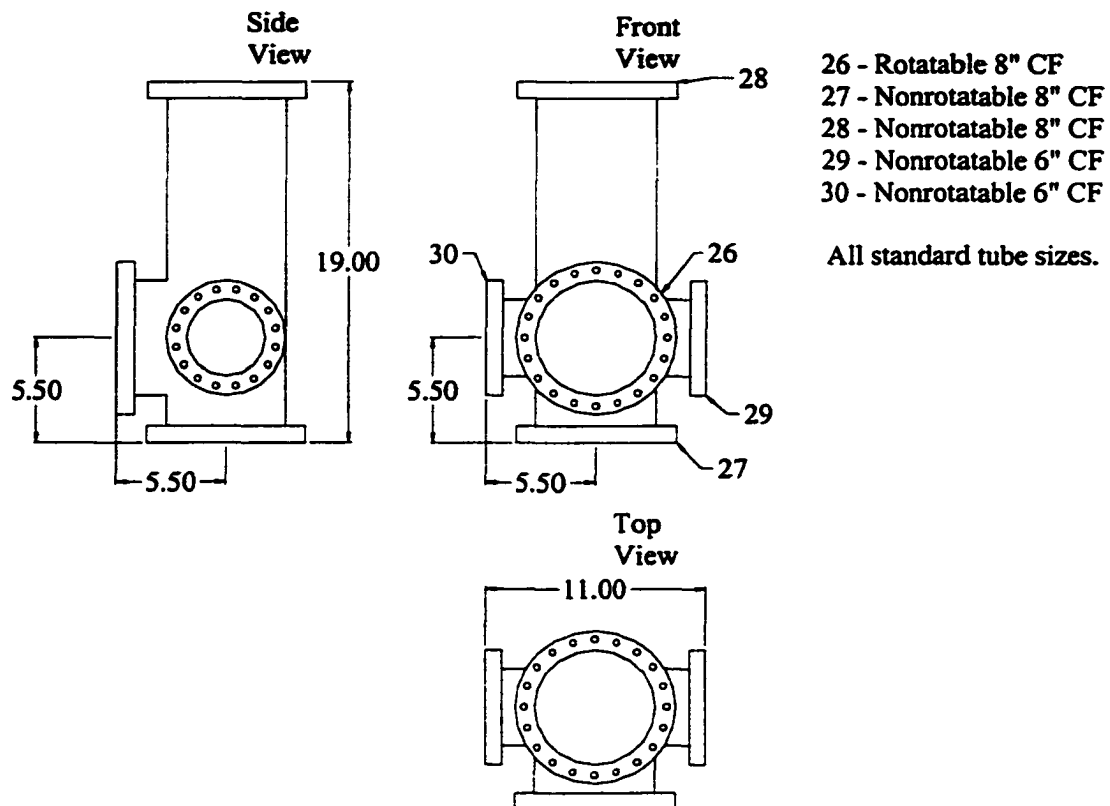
Design drawings for the pumping cross of the UHV STM Vacuum Chamber.
